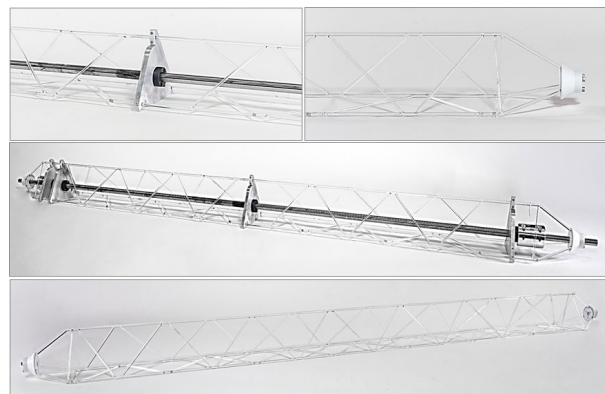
Photographs of the prototype 2m welded glass truss, built in borosilicate, with and without assembly jig in place.
